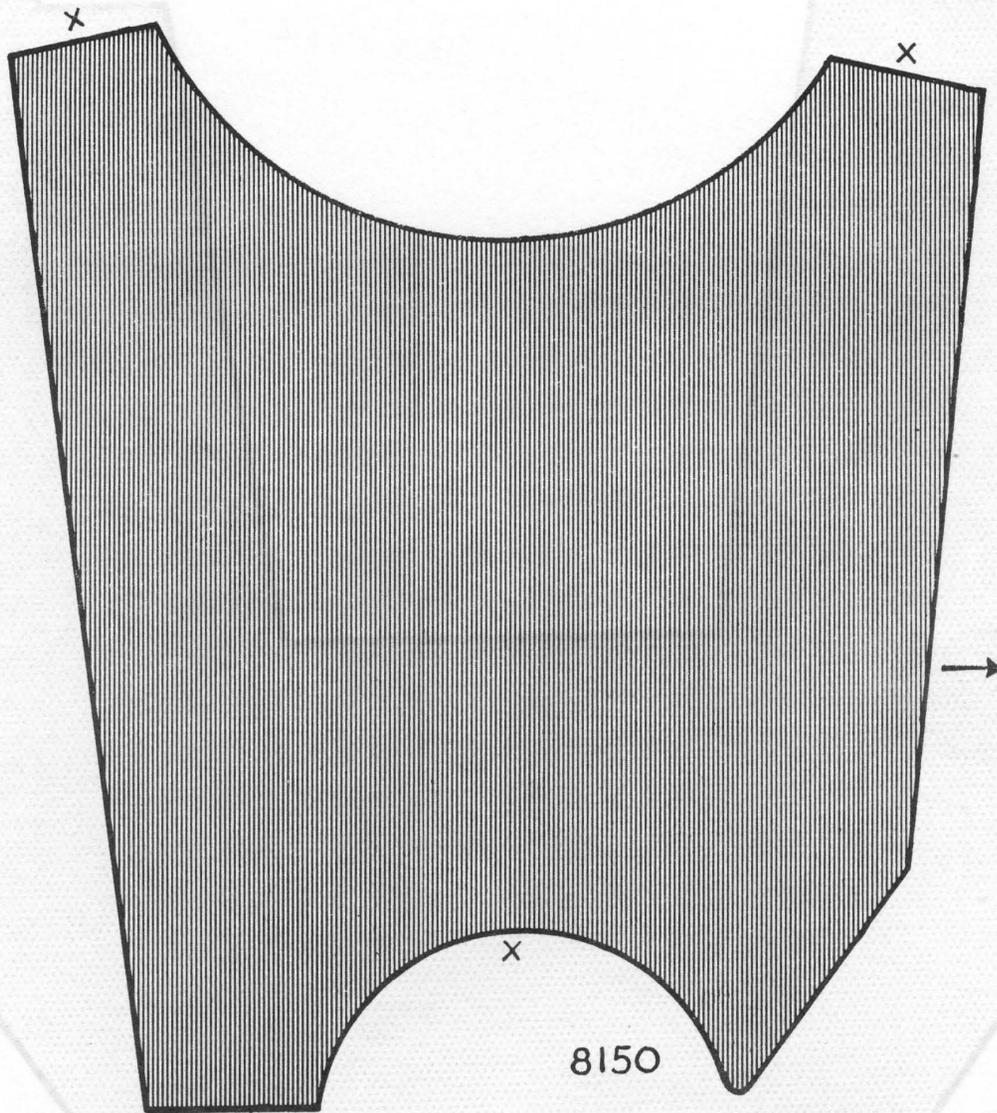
Wooden rear gap gauge for Alpine cars, fabricated from 1 in. (2.5 cm.) thick hardwood by gluing a carefully drawn tracing of this illustration to the wood and then cutting out with a suitable saw, the critical faces are marked with an "X"
